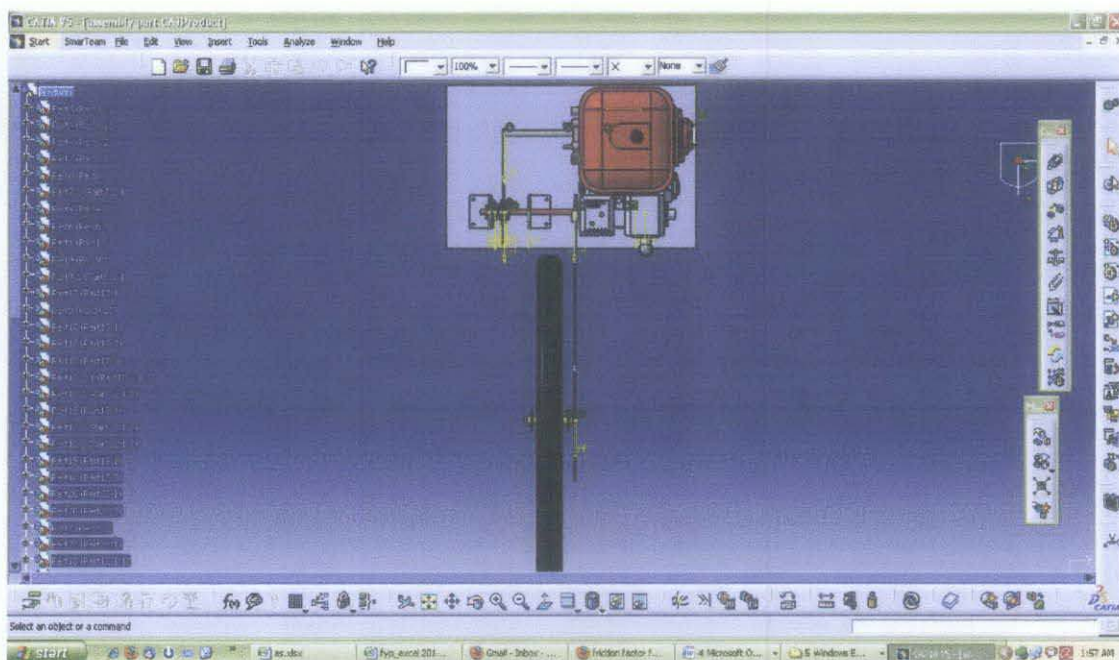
Model of Drive Mechanism and Powertrain assembly (top view)
